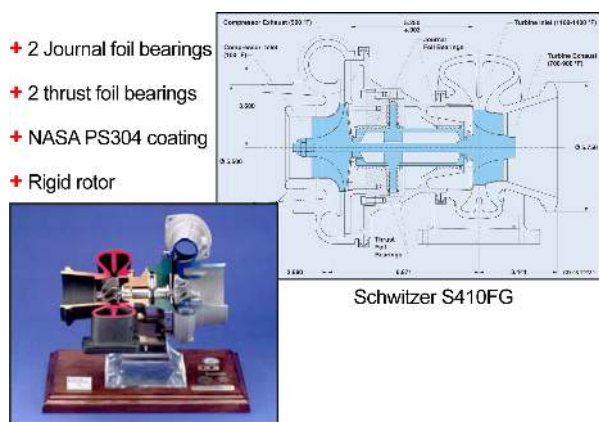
Cutaway photograph of the NASA Oil-Free turbocharger.
